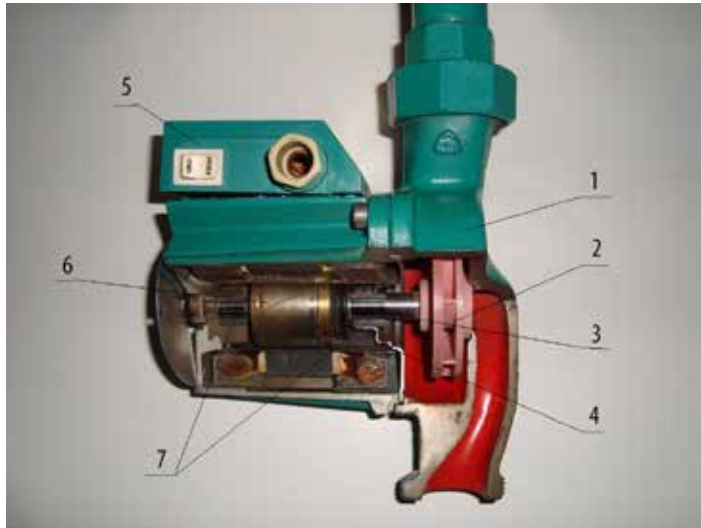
The construction of a glandless pump: 1 – pump housing, 2 – impeller, 3 – shaft, 4 – stator housing, 5 – control box, 6 – rotor, 7 – thrust bearing (Source: T.J. Teleszewski's private archive)
